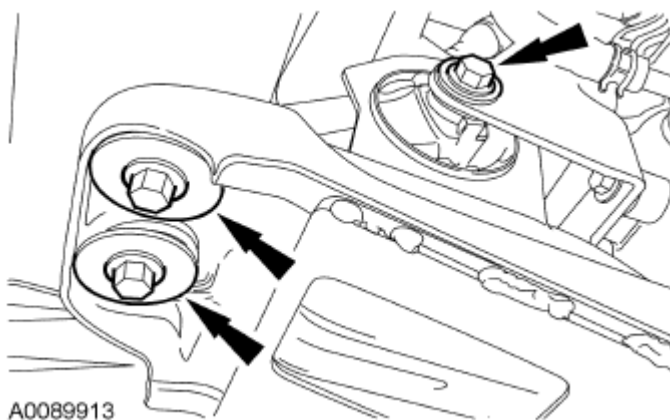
Locating Front Roll Restrictor Bolt And Engine Support Crossmember Bolts
